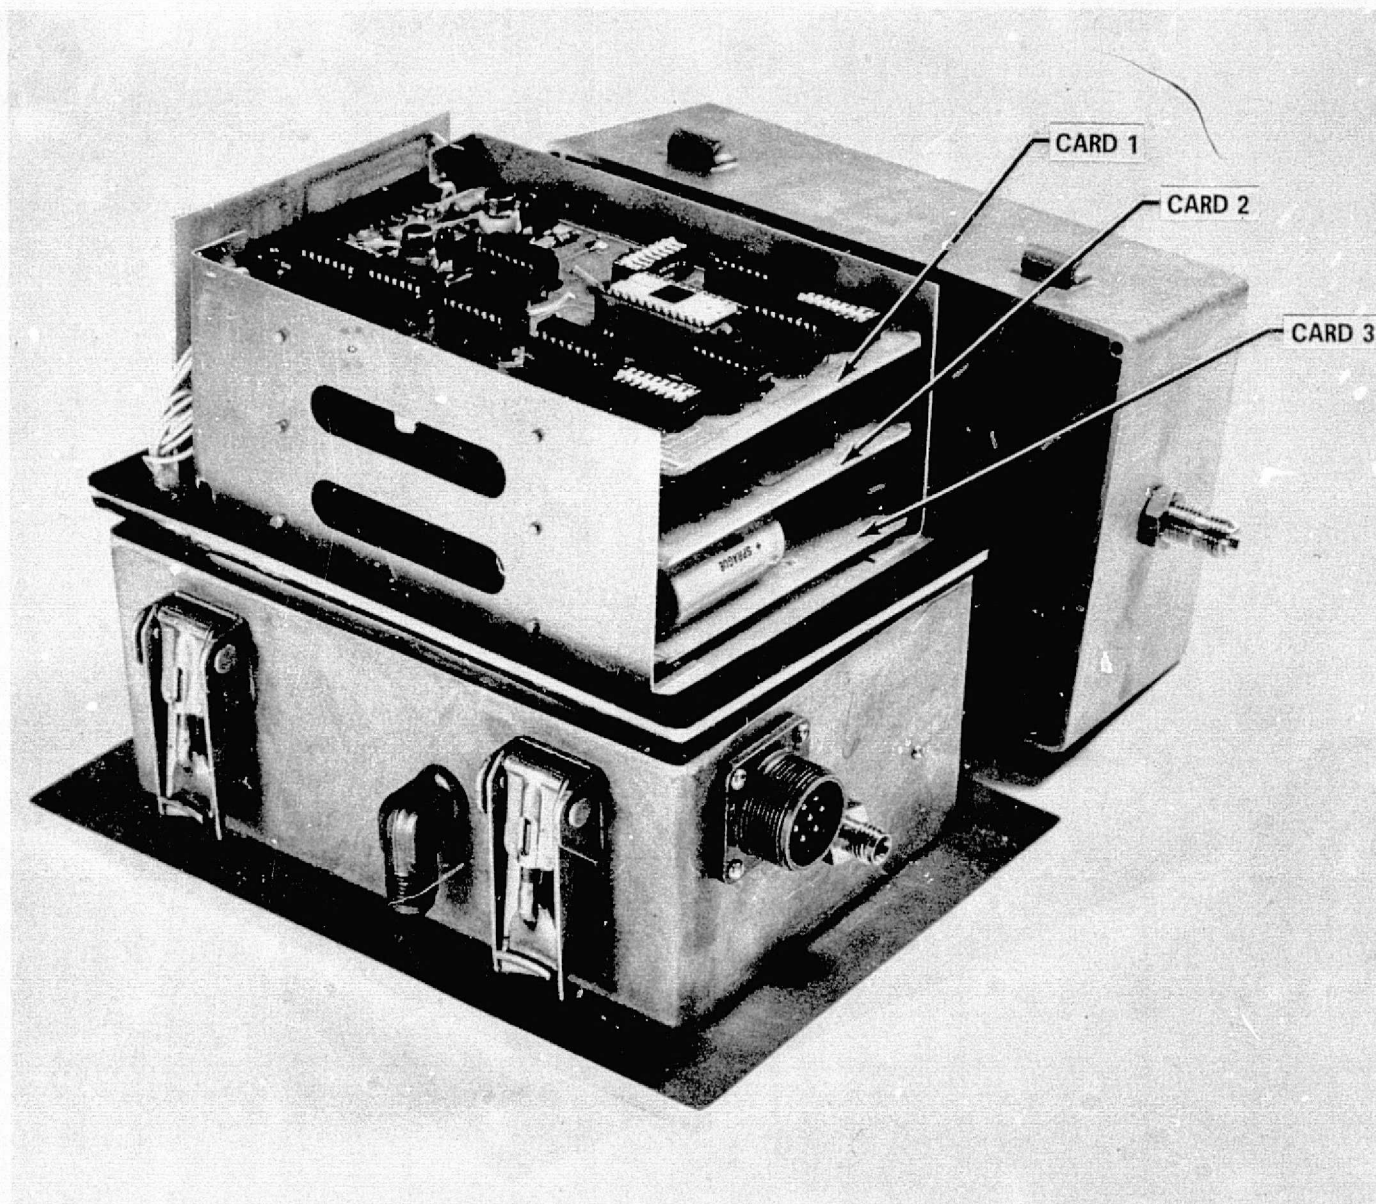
PACKAGE WITH COVER REMOVED
